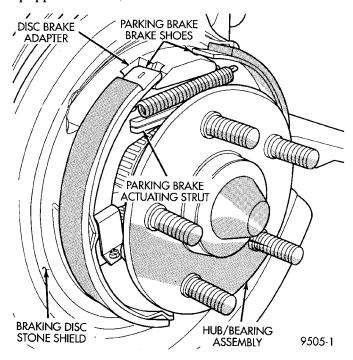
Park Brake Assembly With Rear Disc Brakes
